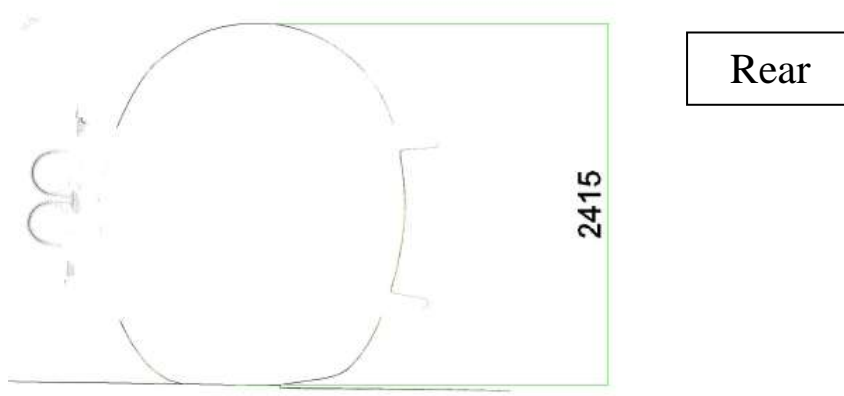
Deformation of GRW tanker J3910 from laser scans after test - rear dimensions in mm
